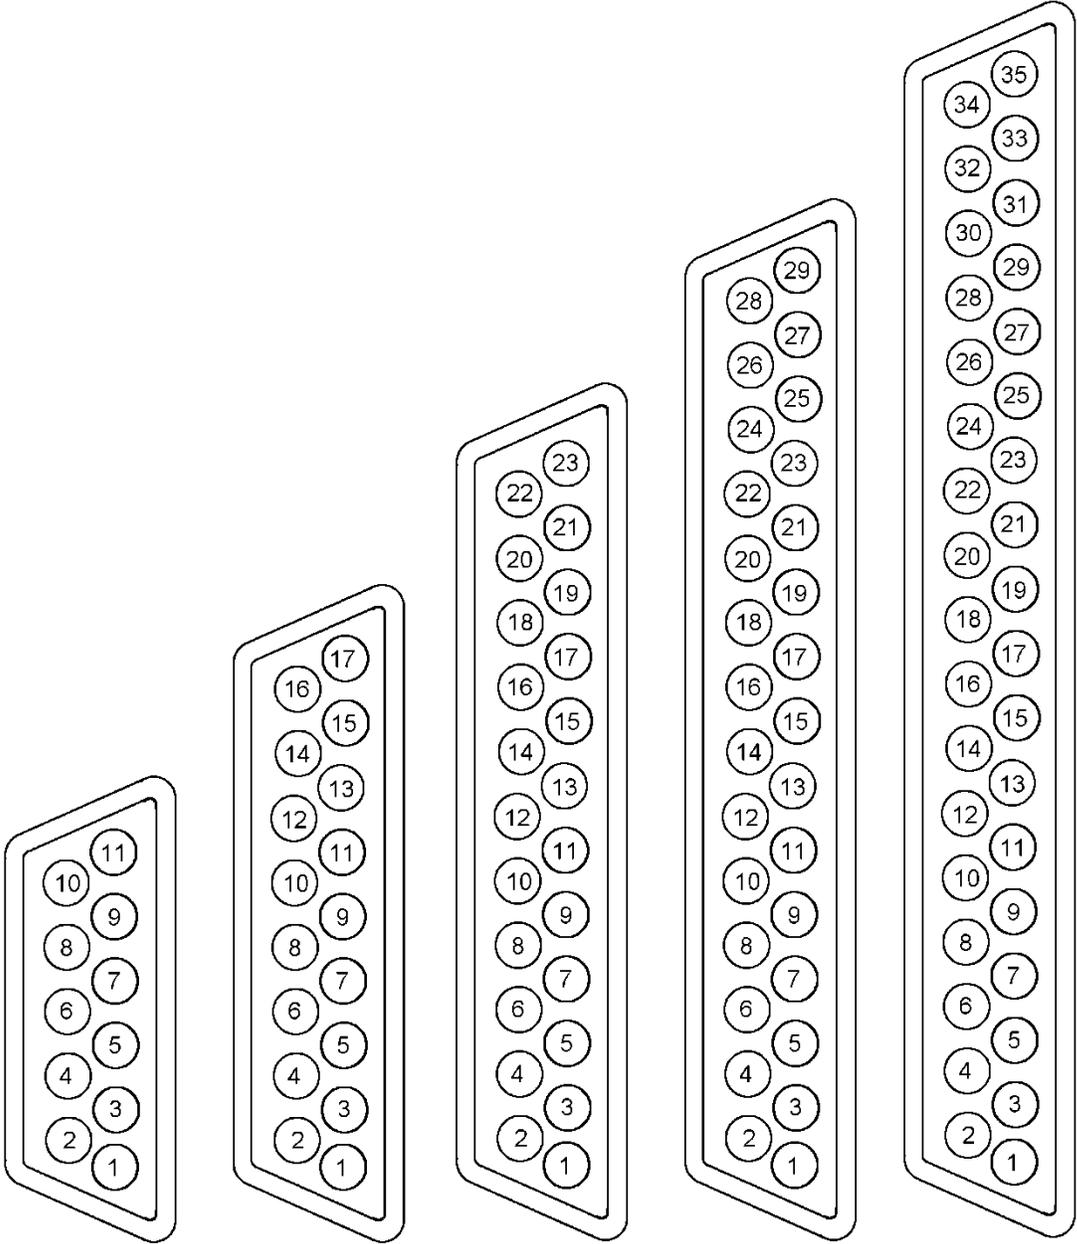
Insert arrangement for contact spacing connectors (female engaging face).
